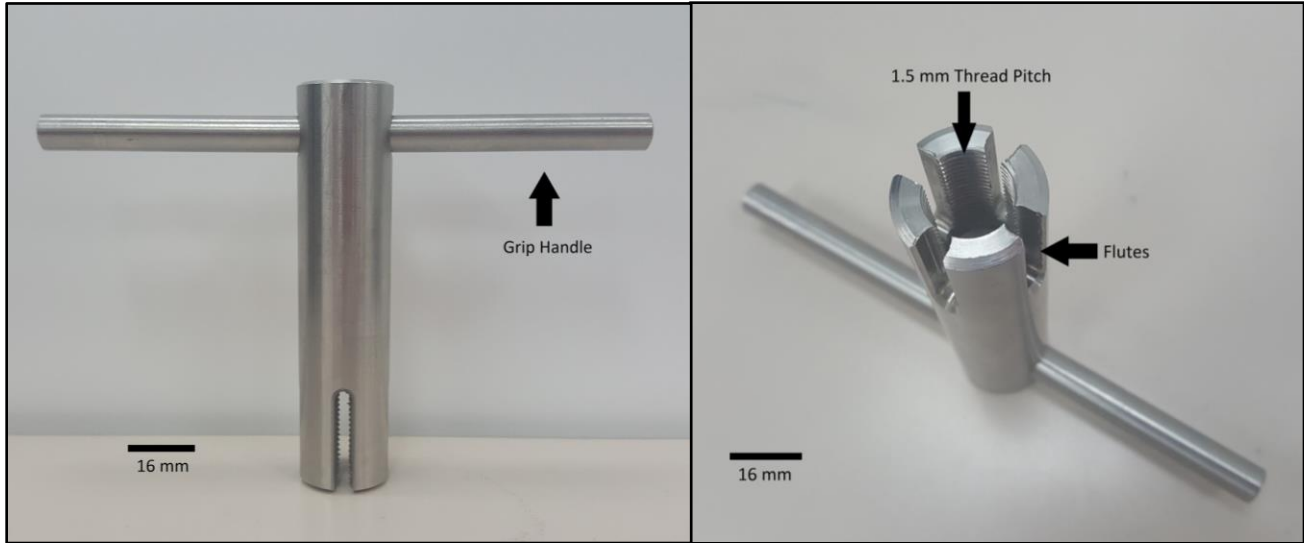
Depicted is the die system used to create threads on the external profile of the graft before insertion into the recipient site. The die would be inserted through the guiding platform to maintain alignment as it creates the external threads in the cartilage and subchondral bone.
